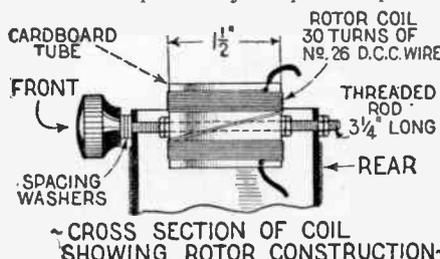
Constructional details of the adjustable losser described in the article which can be readily made by any constructor.
